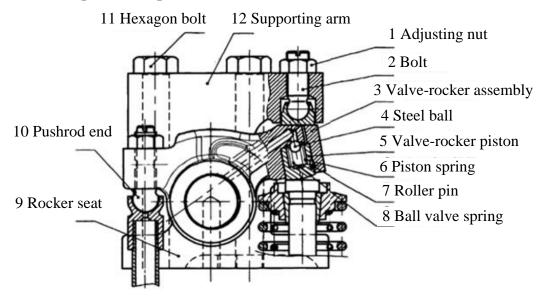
Exhaust valve and EVB clearance adjusting
